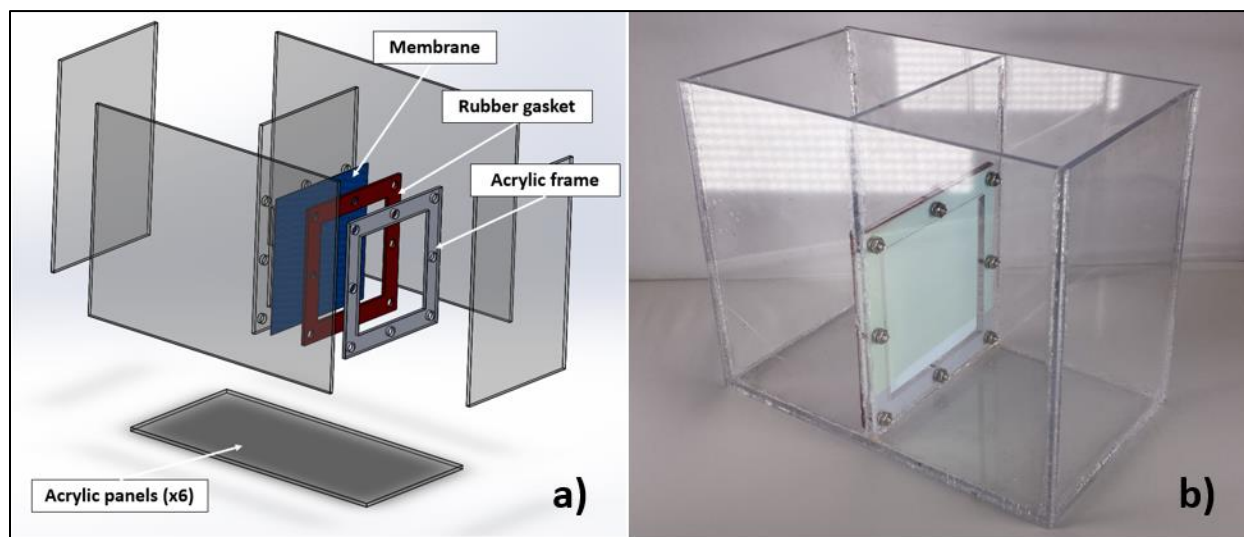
a) Exploded view of Solidworks assembly. b) Final assembly of Memboxx 1.0 with FO membrane in place.
